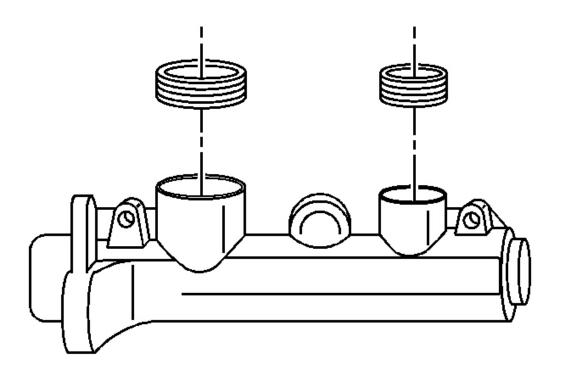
Brake Master Cylinder Seals Courtesy of GENERAL MOTORS CORP.
